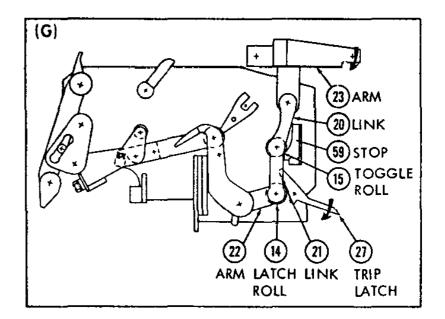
Fig. G -- Breaker Opening, Springs Charged. To open the breaker, trip latch (27) is rotated by depressing latch, releasing latch roll (14). Arm (22)rotates about its center, allowing links (20, 21) to drop. This rotates arm (23) about its center, opening the breaker. Toggle roll (15) is forced back by the curve of stop (59), breaking the over toggle of links (20, 21) and allowing them to reset. This rotates arm (22) back into reset position with latch roll (14)back of latch (27).
